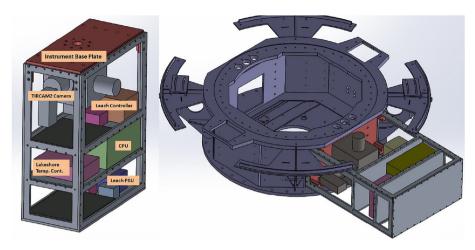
AutoCAD drawing and SOLIDWORKS model of the TIRCAM2 rack assembly.
